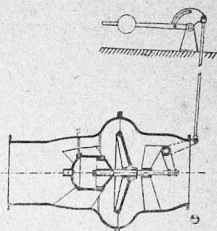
SELF CLOSING VALVE FOR PIPE LINE.
